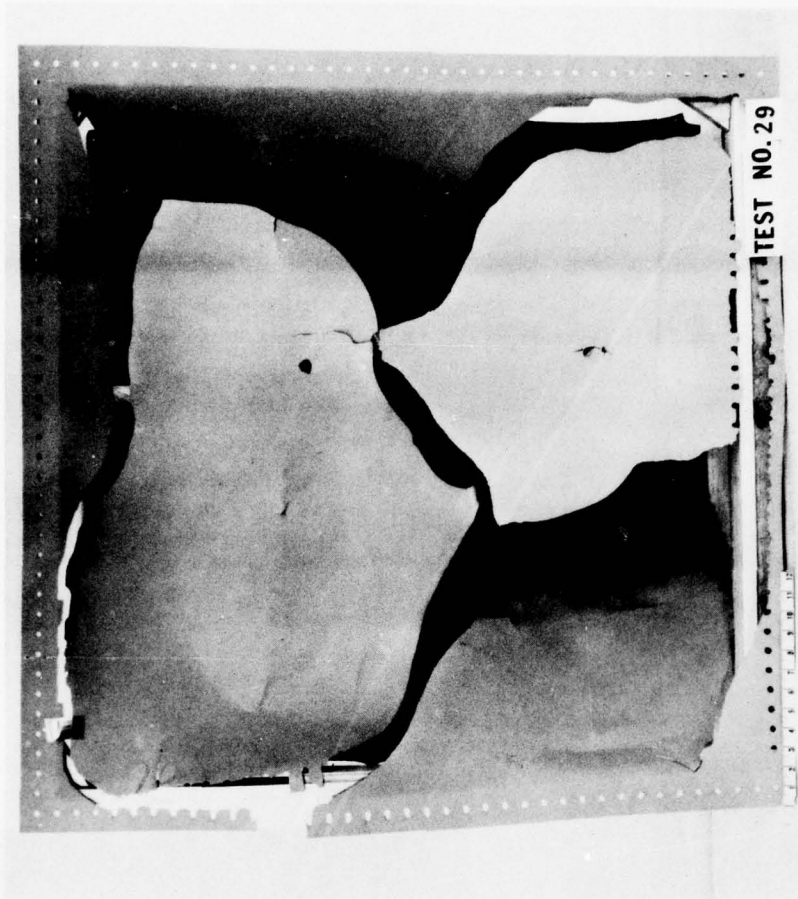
Combined Fragment and Blast Damage to Thinner 7075-T6 Aluminum Front Panel Tested with Empty Fuel Tank
